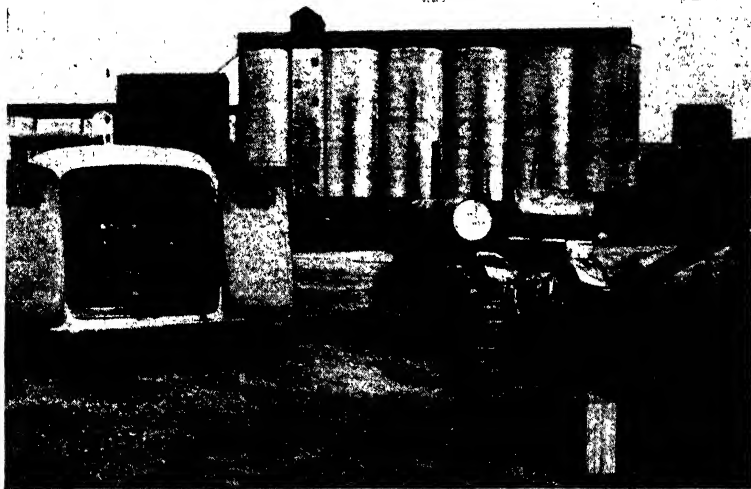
Note the care with which this serviceman fastened his ground to his work (clamp on the wheel). A firm, well-placed ground ensures better welding. (Courtesy of R. G. LeTourneau, Inc.)
